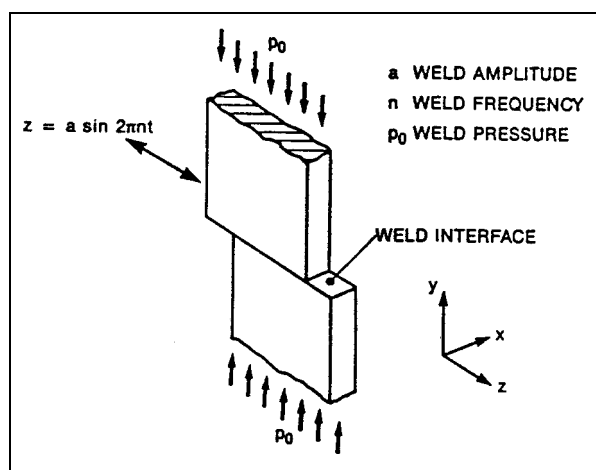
Linear Vibration Welding. Part surfaces are rubbed together in a longitudinal direction, along the z axis, generating heat through friction. Processing parameters are the weld amplitude, a , the weld frequency, n , the weld pressure, p_0 , and weld time, t . Pressure is applied along the y axis, 90° to the vibration.
